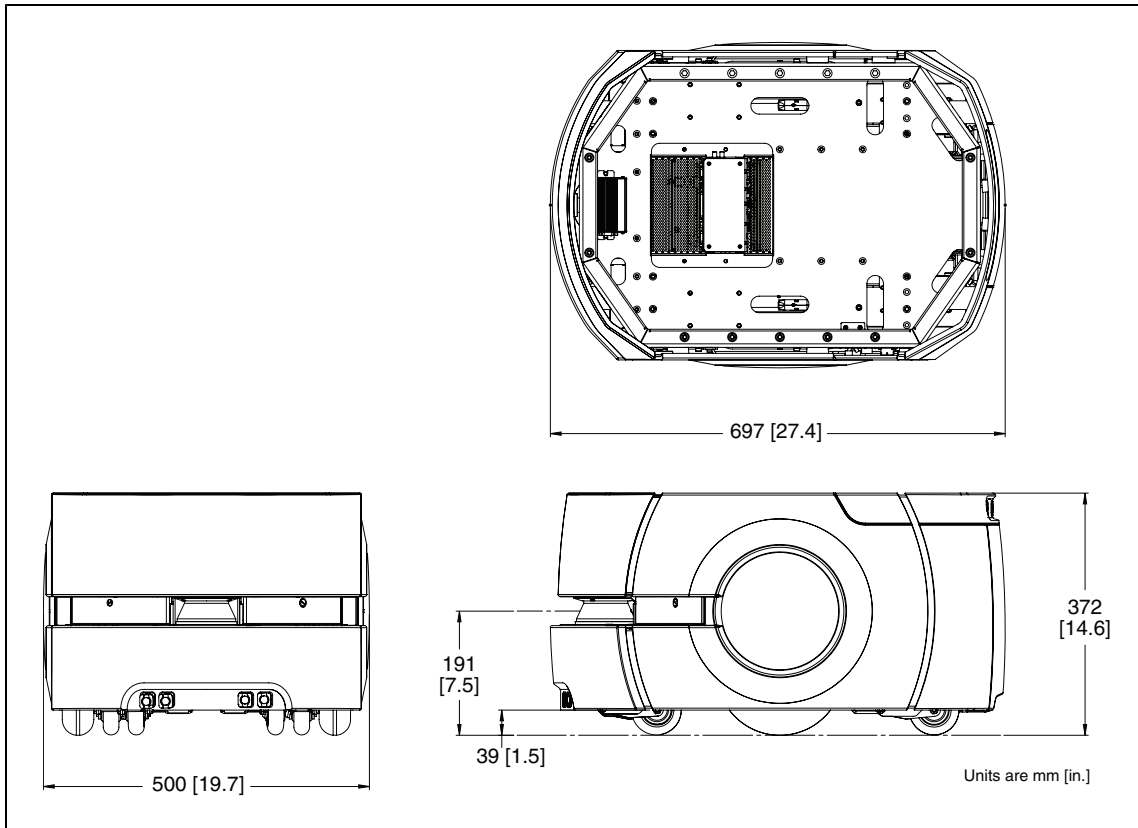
Pioneer LX Top, Side, and Front Dimensions
